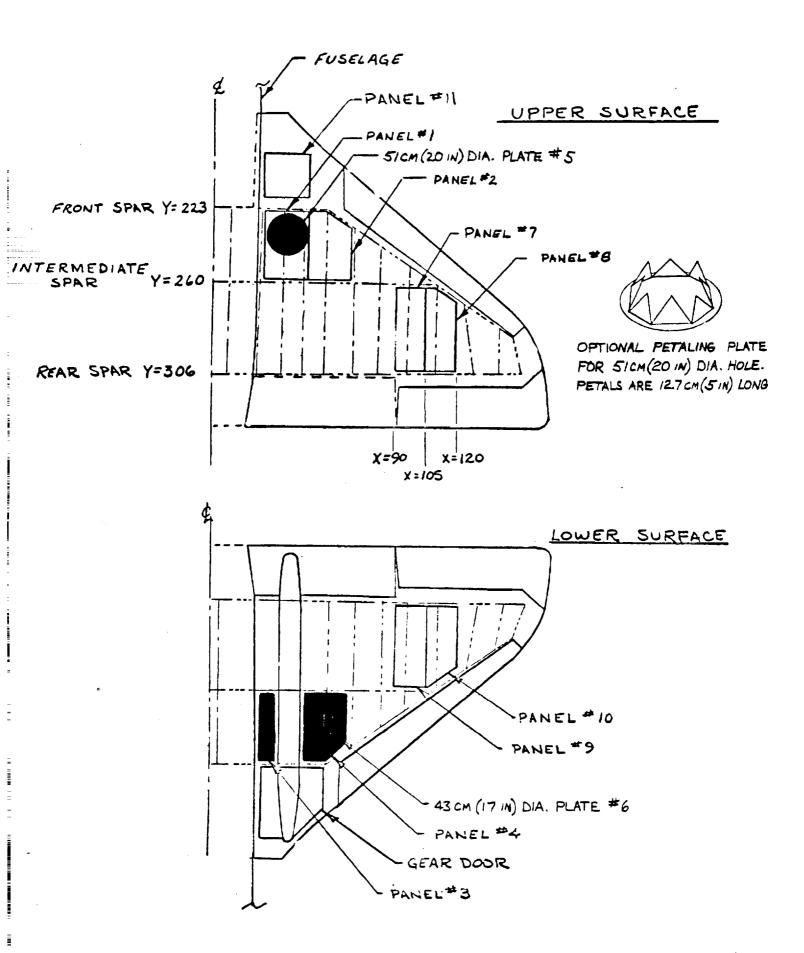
HOLE CONFIGURATION #1. PANELS 3&4 AND PLATES 5&6 REMOVED
